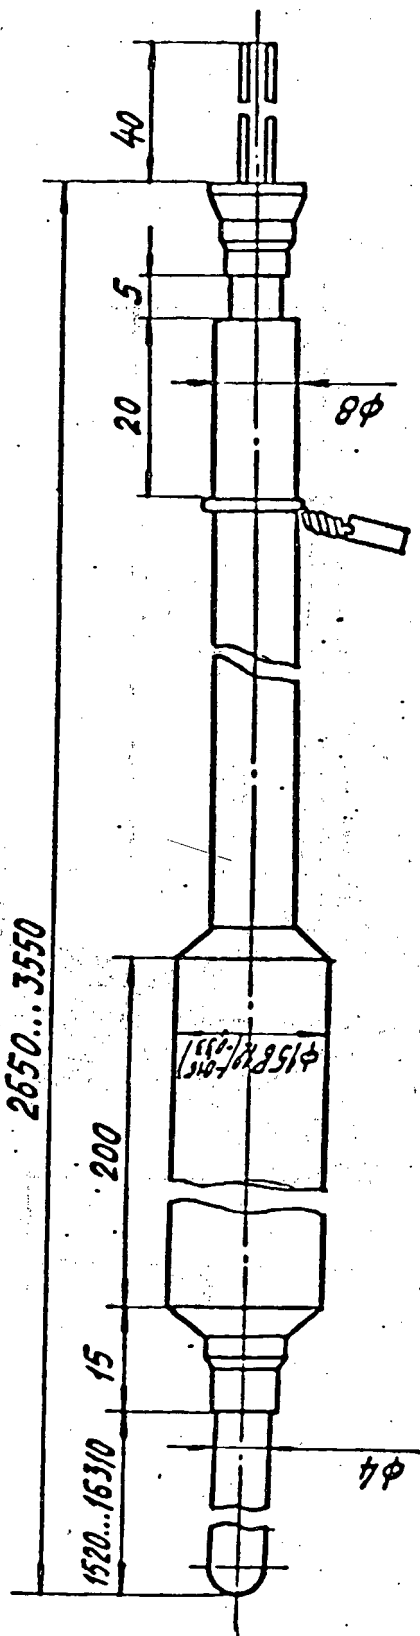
Outline drawing of Chromel-Alumel cable-type thermocouple.
